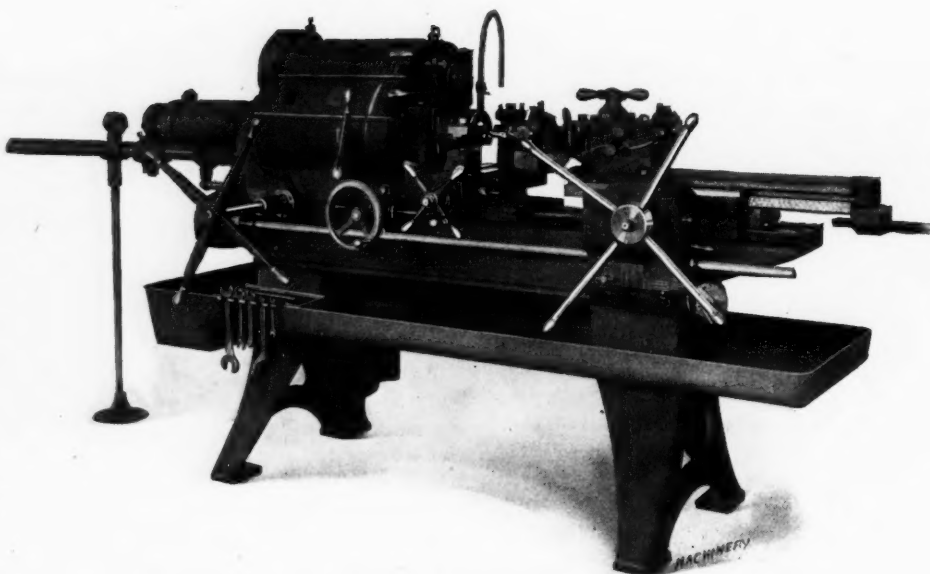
Foster No. 5 Screw Machine with All-gear Head and Bar Equipment
